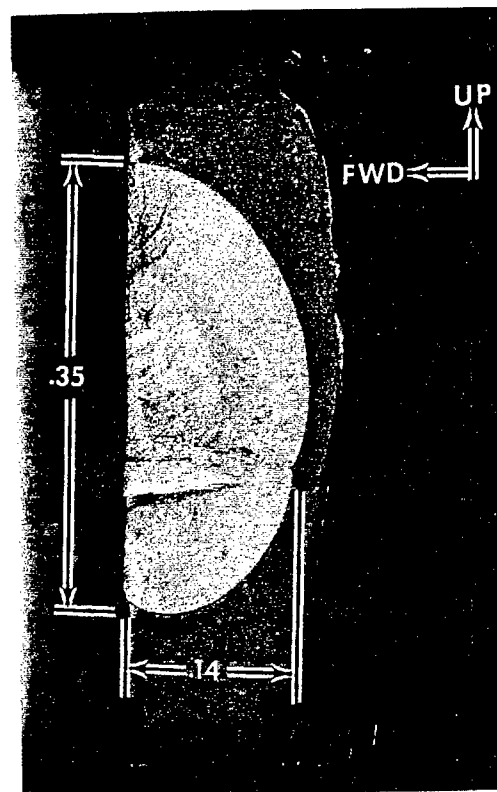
Multiple Hole Wall Crack Pattern and Extent after Opening
